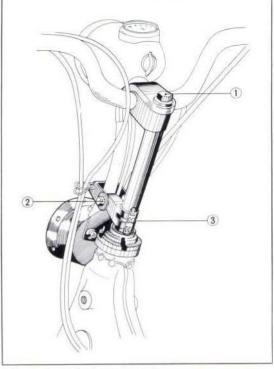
① Handle setting bolt ② 6×40 mm hox bolt ③ Adjusting position
